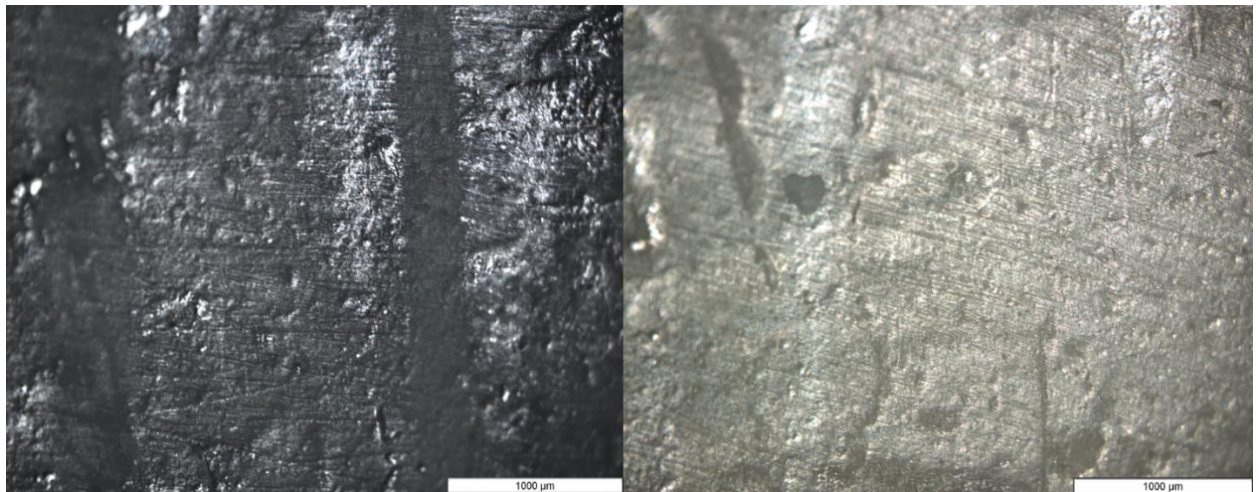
OM surface micrograph of the 12Ce-ZrO after the milling machine. Left milled surface, right surface without milling process.
